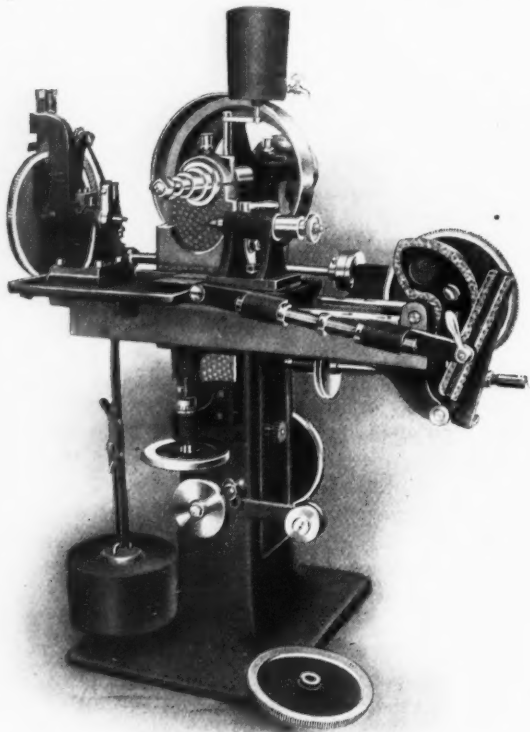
The Dwight Slate Cam Actuated Automatic Gear Cutter.
